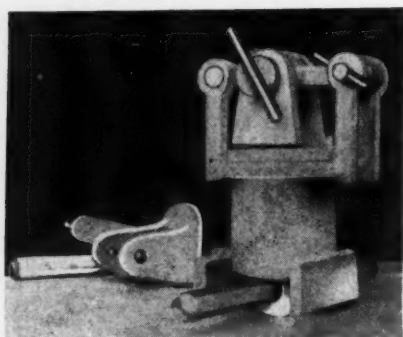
Welding Fixture for Fabricating Handle Fork for Lift Truck. This Fixture is also of Welded Construction.
